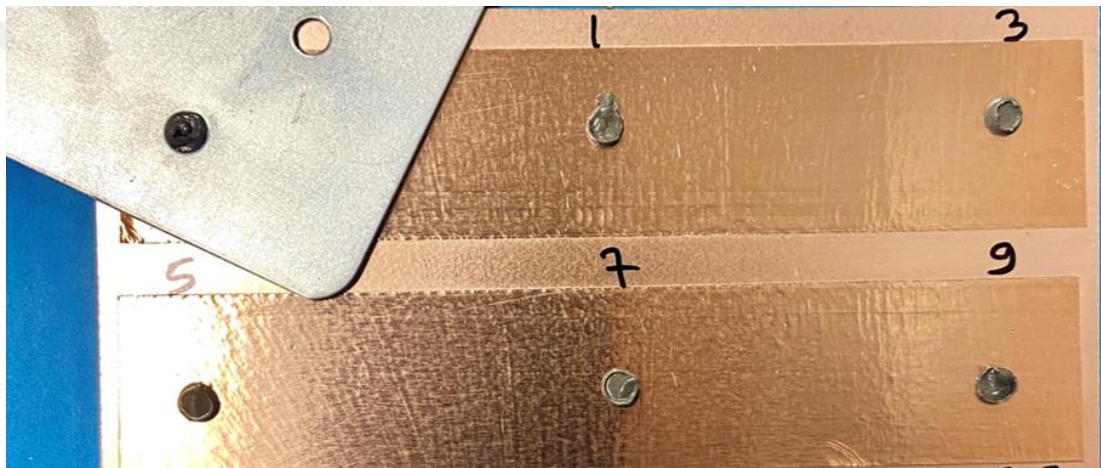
Aluminum plate that allows equal amounts of solder paste to be placed on the copper plate
